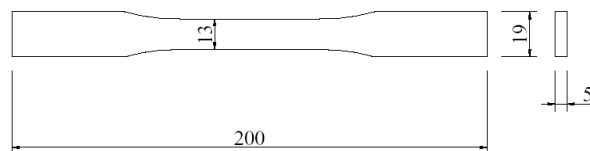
Specimen dimensions of the tests conducted by Liu [3]. Dimensions in [mm].
